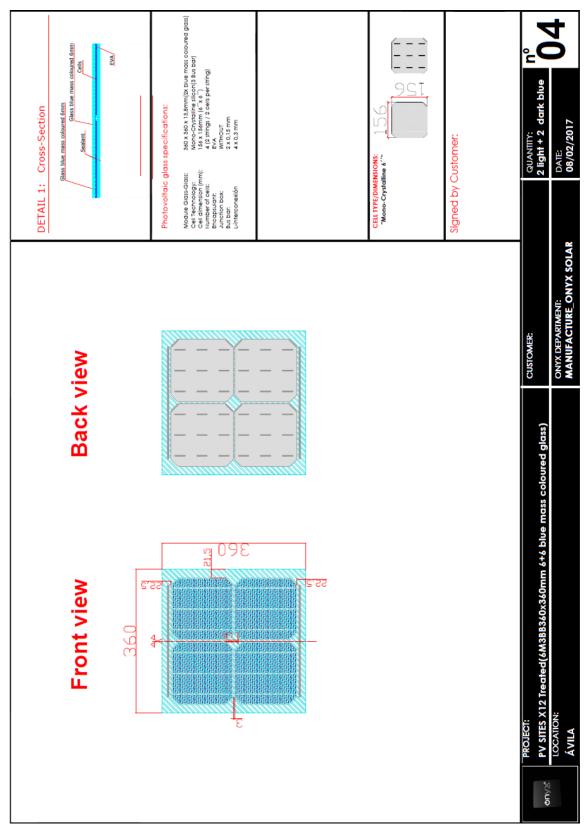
Manufacturing drawing of samples X12-8 and X12-9
